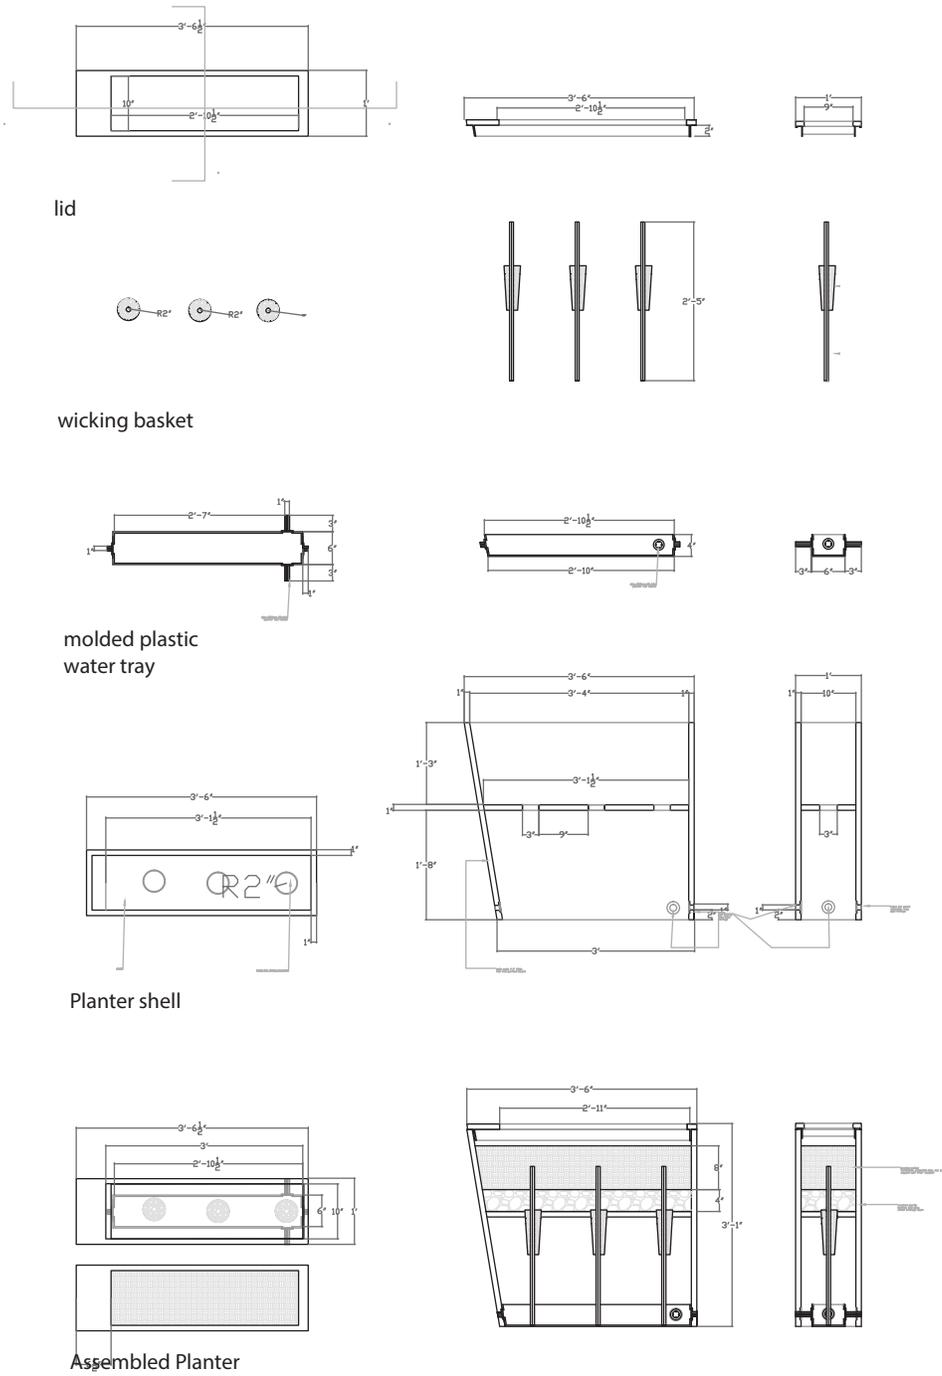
FIGURE XIII: TALL PLANTER INTERNAL DETAILS
